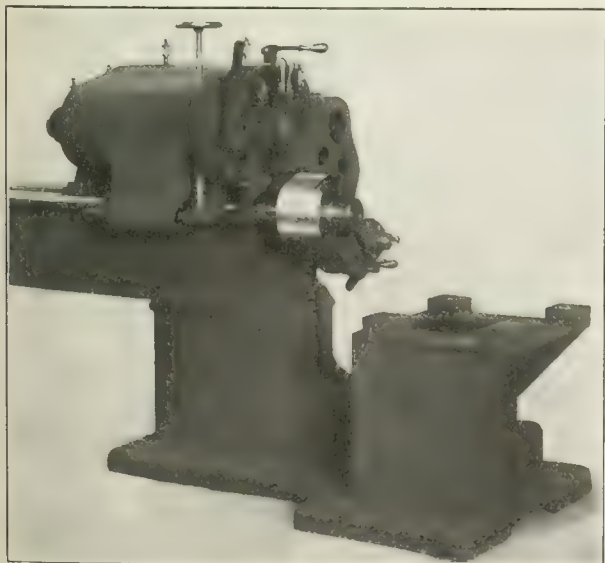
Fully Inclosed Gears of 20-in. Headstock.
